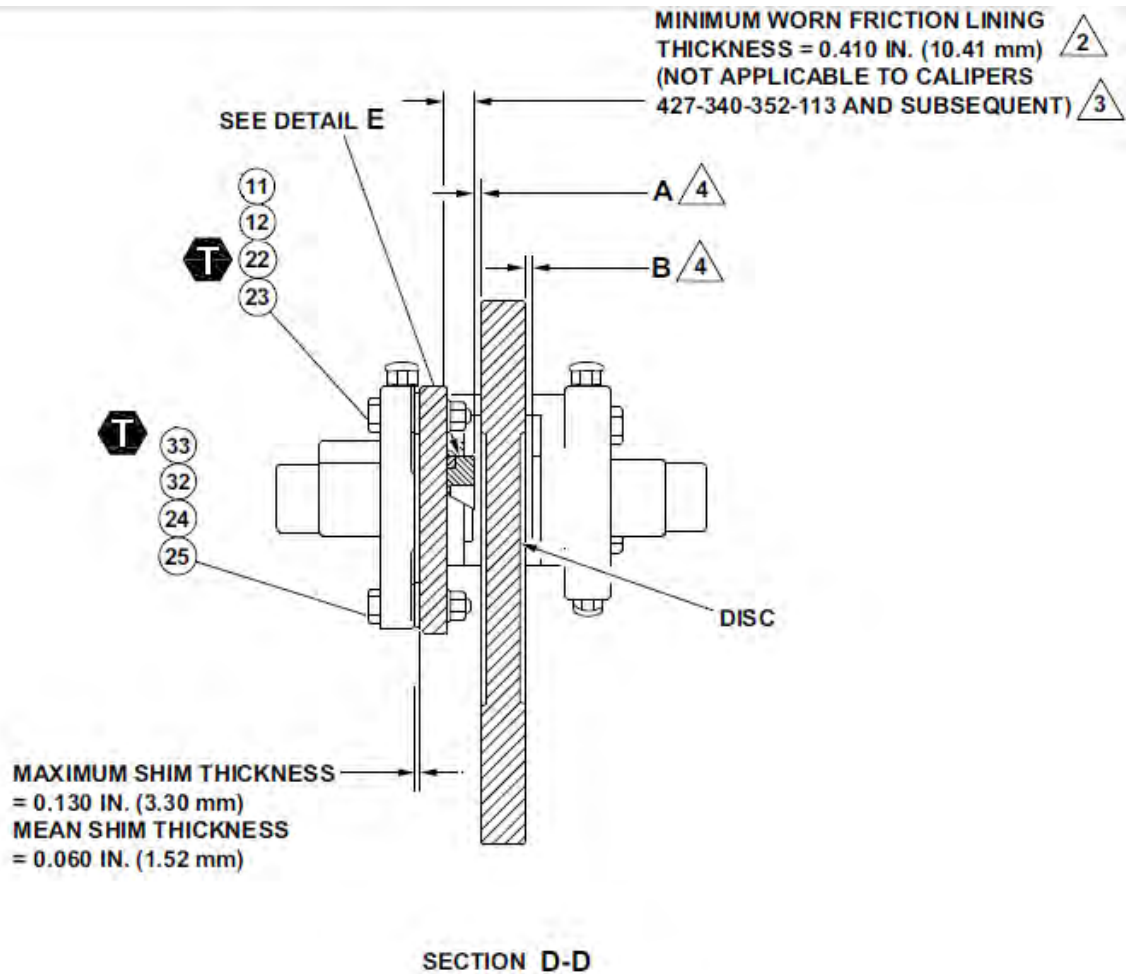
Rotor Brake System – Removal/Installation (Sheet 3 of 4)
